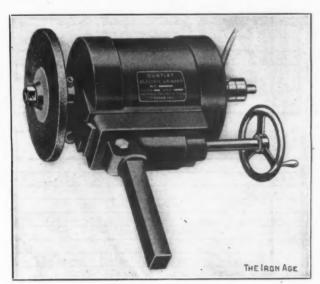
The Duntley Tool Post Grinder Made by the Chicago Pneumatic Tool Company.
